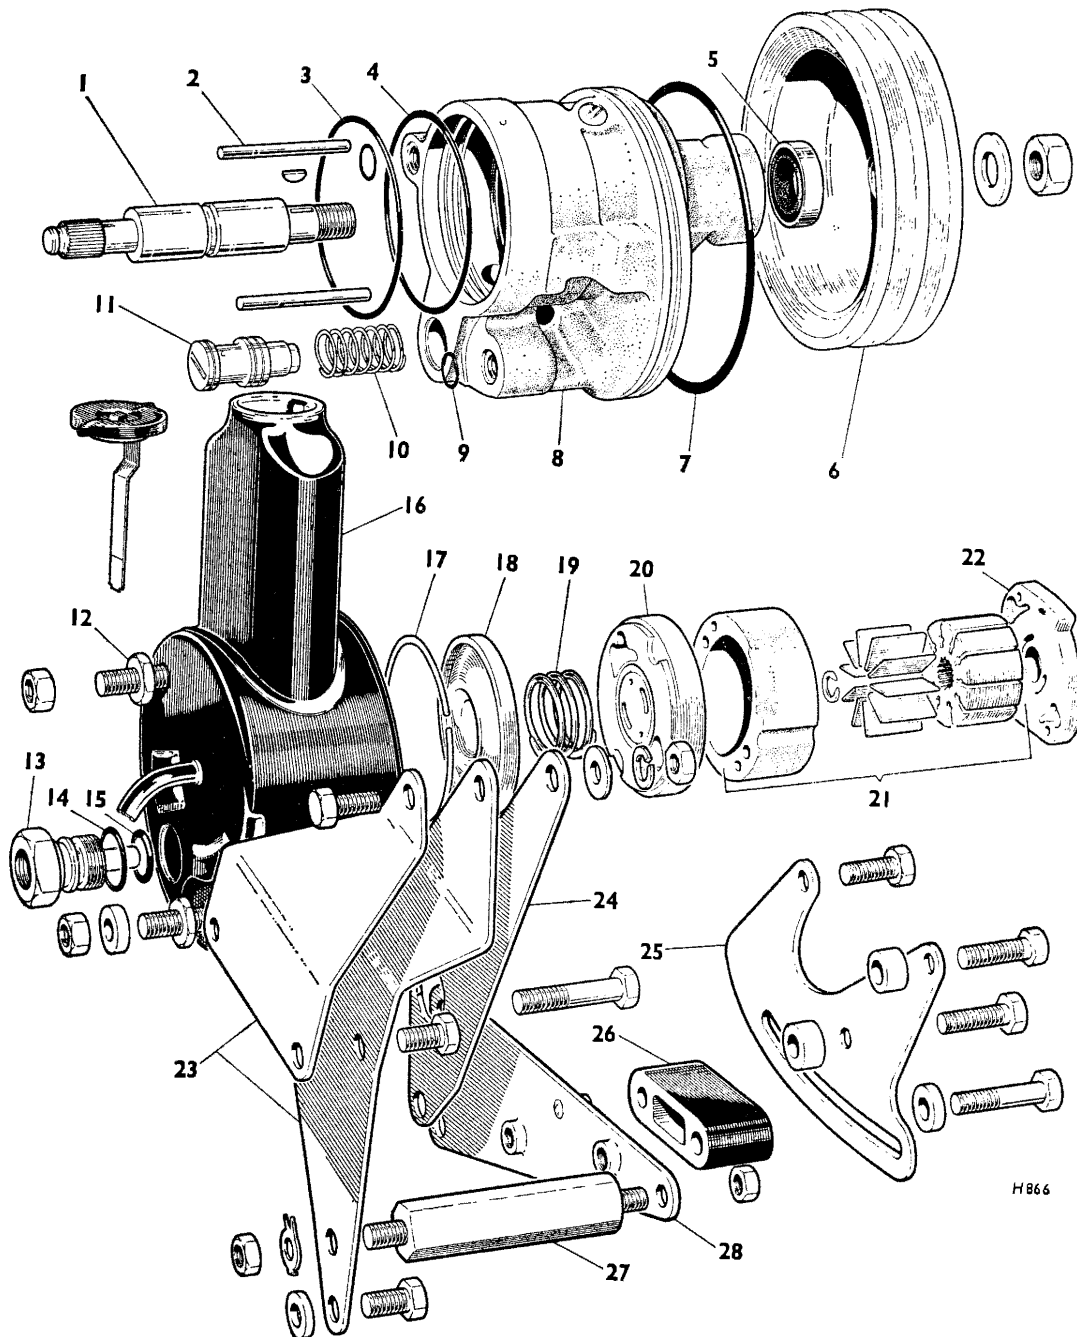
EXPLODED VIEW—STEERING PUMP (SAGINAW) AND MOUNTING BRACKETS
